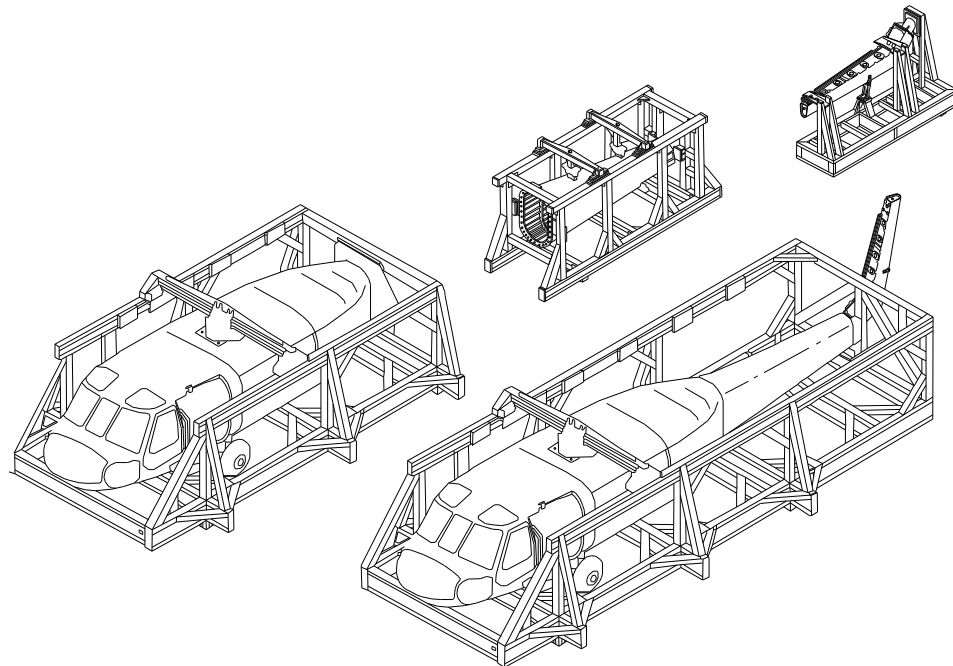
Several Fixtures Used in an Assembly Line [2]
